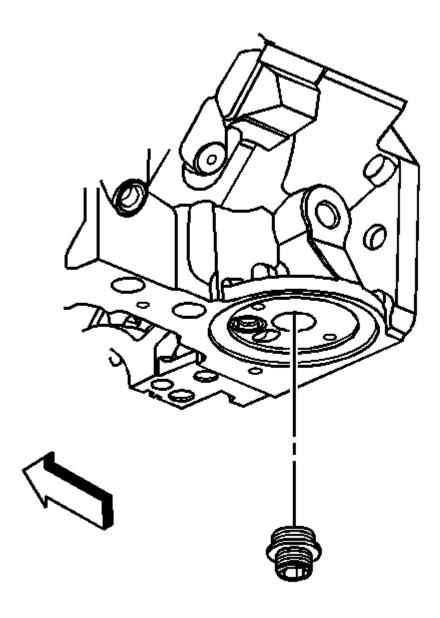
View Of Oil Filter Fitting Courtesy of GENERAL MOTORS CORP.
